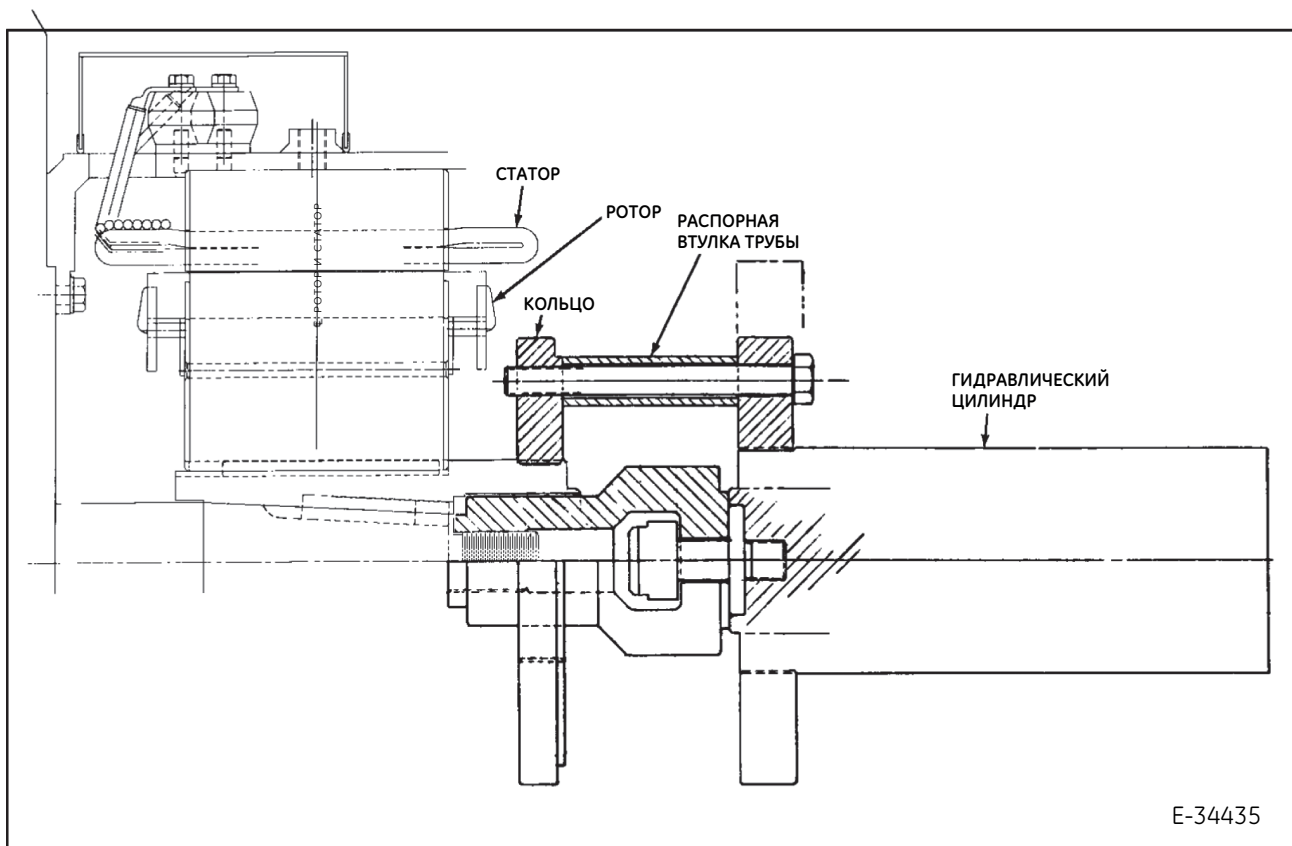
Hydraulically Seat Rotor on Air Compressor Shaft
